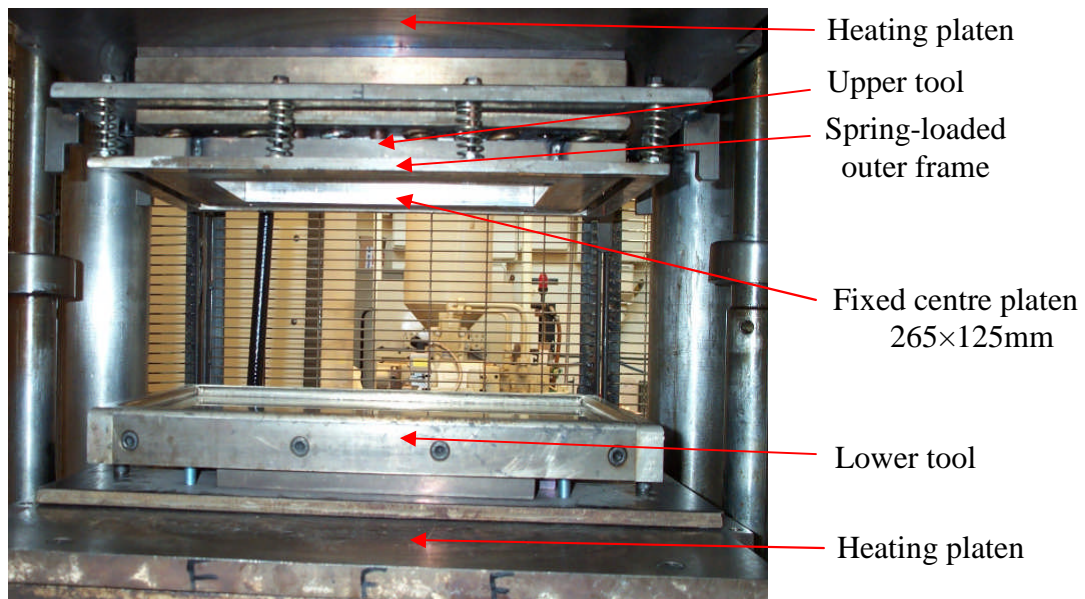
Compression moulding tool mounted in hydraulic press.
